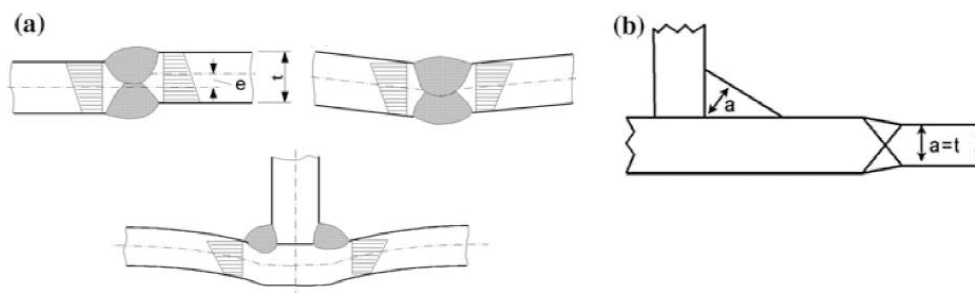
a) Axial and angular misalignment. b) Weld throat
